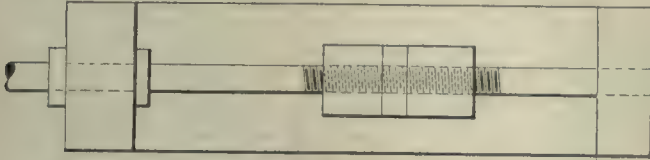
LEAD SCREW NUT LOCATED BY CROSS KEY
